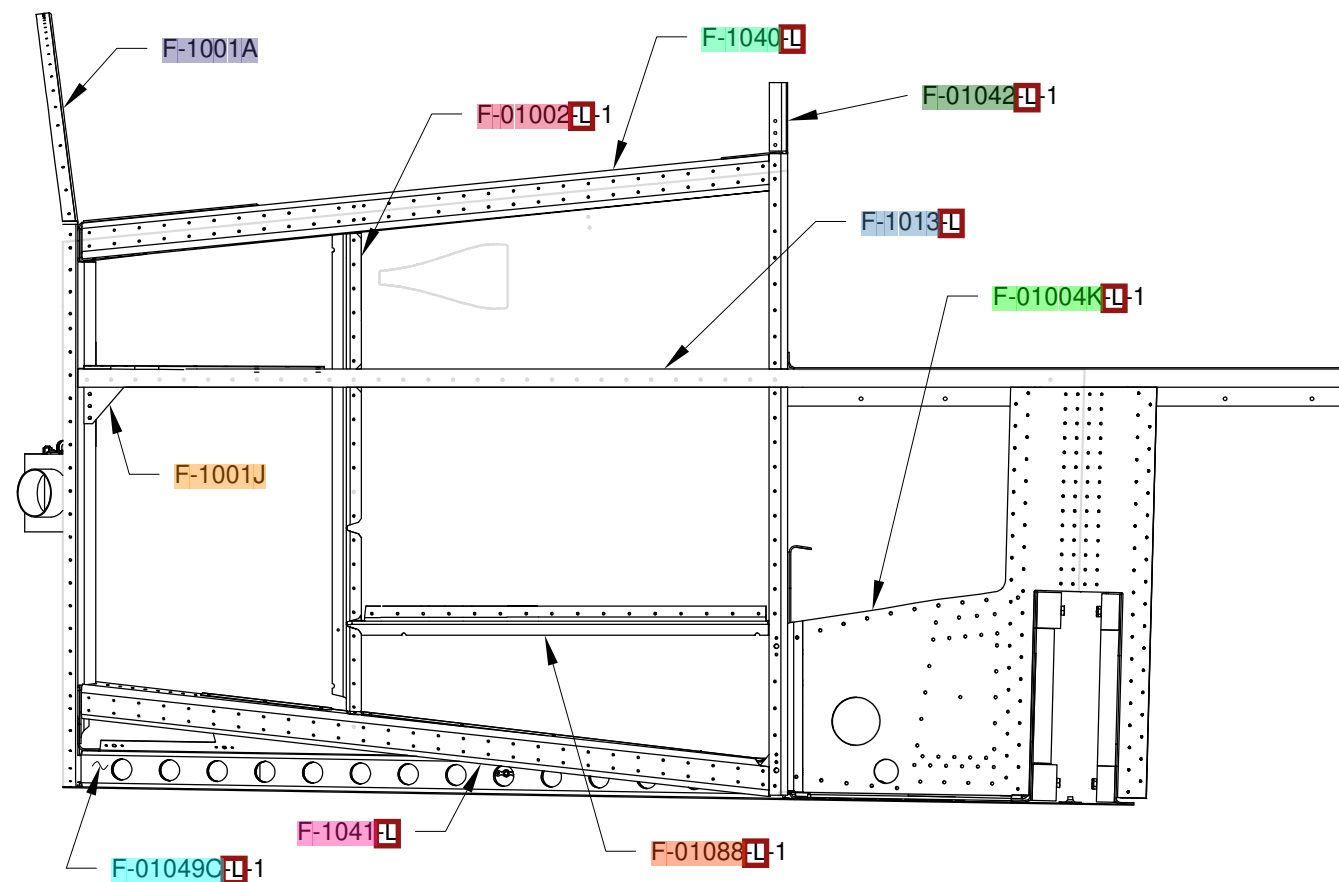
DRILLING THE F-01069-L-1 & -R-1 FWD SIDE SKINS
